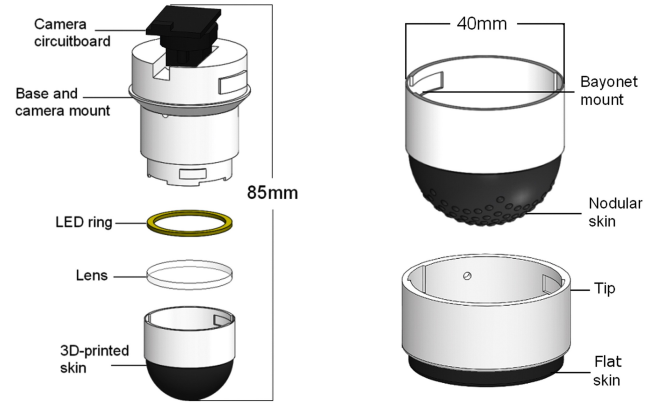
Exploded View of the improved TacTip Sensor (left), the base houses a webcam which is illuminated by an led ring. The modular tips with 3D-printed rubber skin (right) can have several configurations including a nodular fingerprint (above) and flat tip (below) [55]
